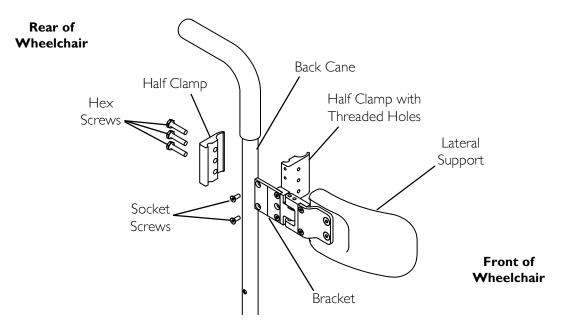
Removing/Installing/Adjusting Tarsys® Lateral Supports
